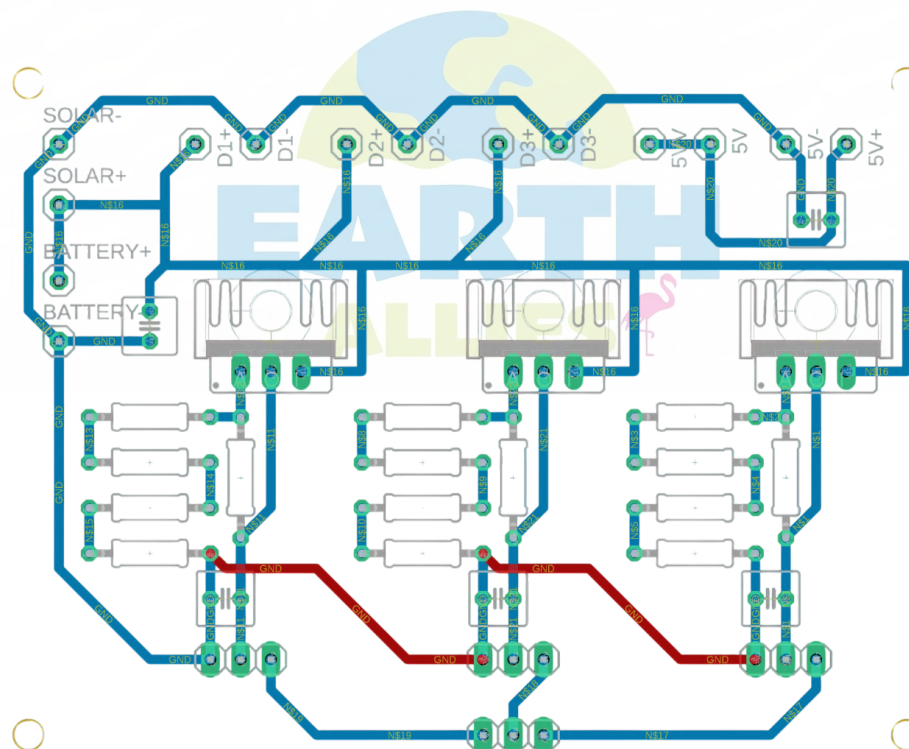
Single-layer PCB layout designed in EAGLE CAD. Due to space and routing constraints on a single layer, specific traces were replaced with manual wire jumpers to complete the circuit (red wires in the figure).
